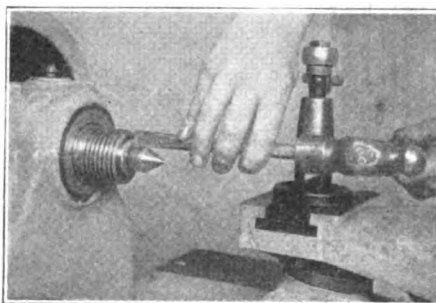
Placing Witness Marks on Lathe Spindle Socket and Center.
